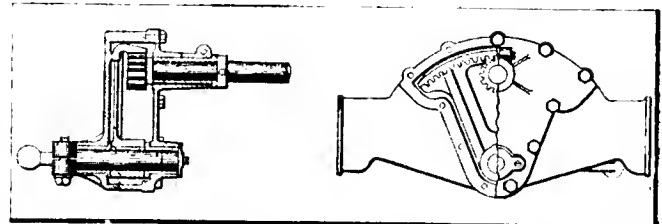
Steering gear, opened up to show pinion and sector, liberal bearings and grease tight housing
